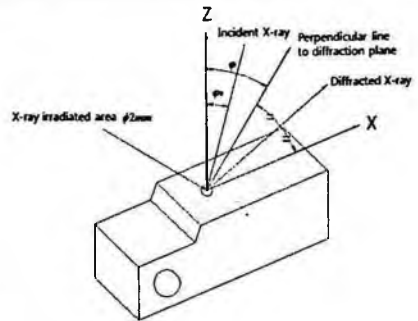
Schematic illustration of X-ray irradiated area on fatigue fracture surface
